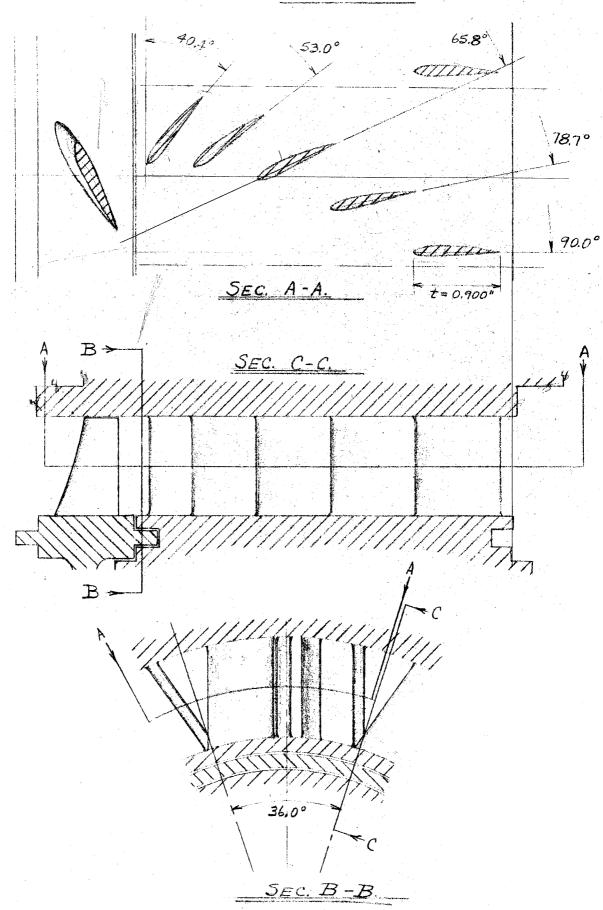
FIG.XV. FAN-VANE CASTINGS, ASSEMBLY
